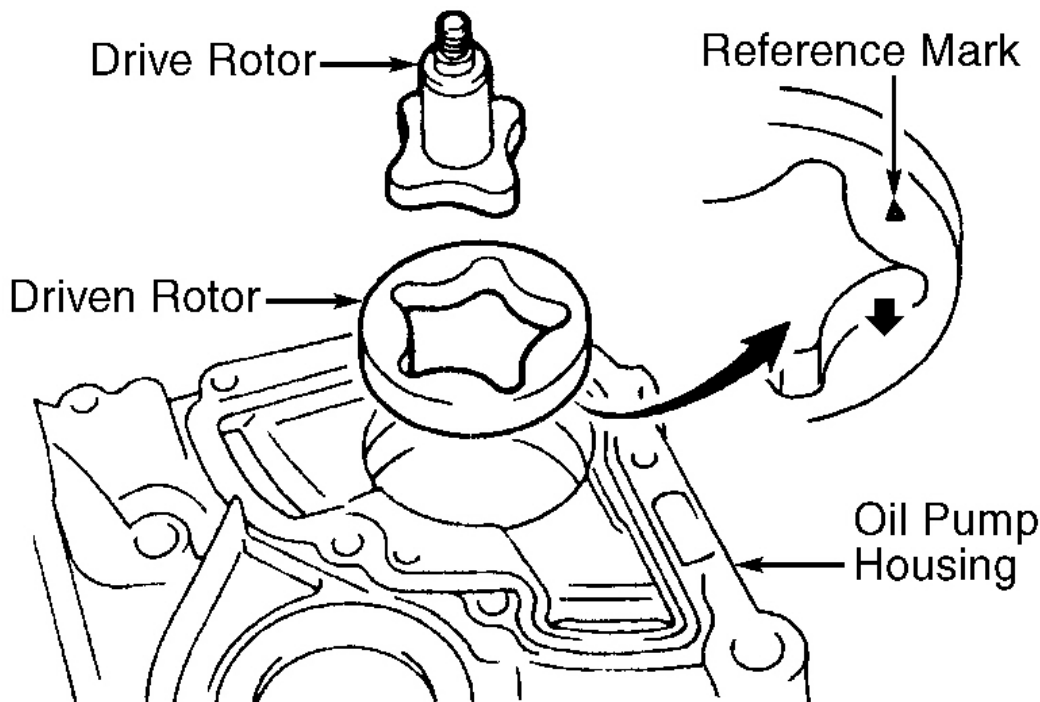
Checking Driven Rotor-To-Oil Pump Housing Clearance & Rotor Tip Clearance
